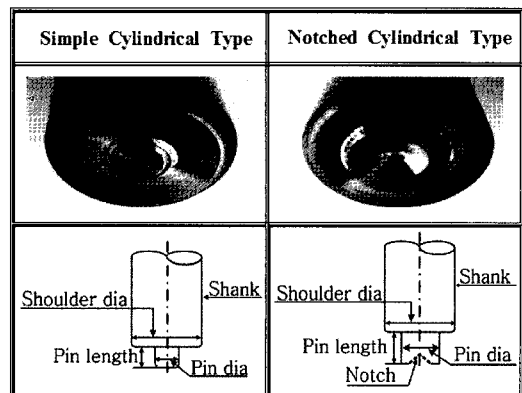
A scheme and photograph of tools for lap-joints by pin FSW
